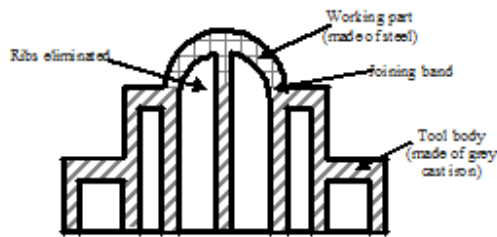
Die design of a stamping die having integrated casting (schematic diagram)
